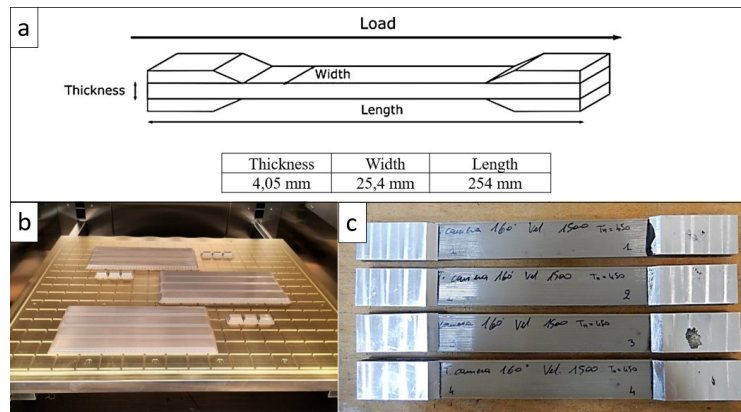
Scheme of the specimen for ASTM D3039 tensile test (a), 3D printed specimens for tensile test as built (b) and after machining and tabs attachment (c). [172]
